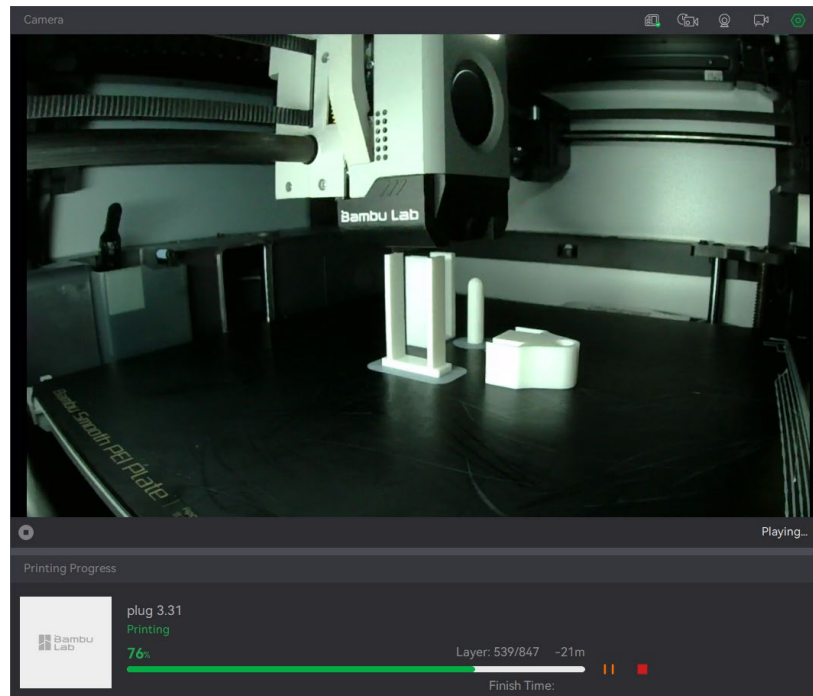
Bambu X1C printing the prongs, covers, and inner cover
